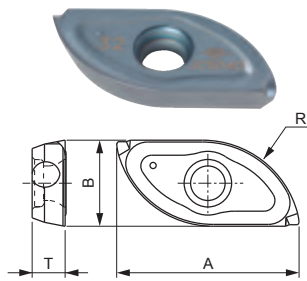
(Main blade for welded &amp; hardened steel) Fig. 4 (Sub blade for welded &amp; hardened steel)
